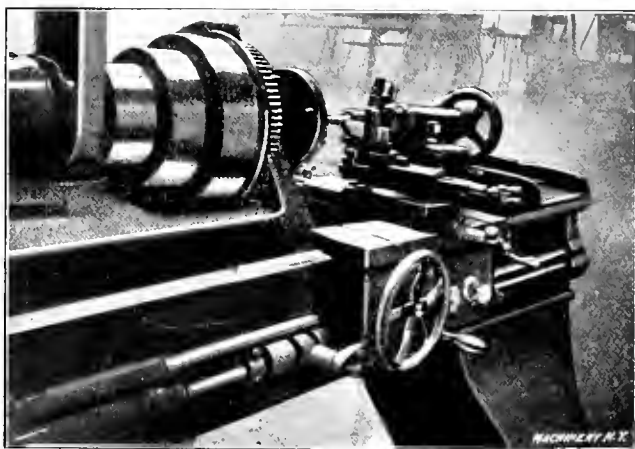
Lathe Fitted with Master Cam for Cutting Multiple-threaded Screws
